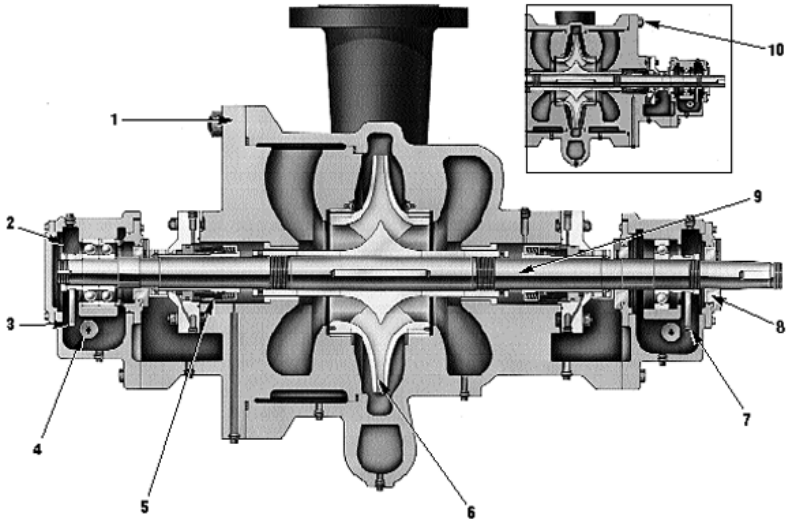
Between bearings, single stage, double section radially split pump—API 610 Type BB2. (1) Pump casing and cover with metal-to-metal confined gasketed joint, (2) Thrust bearing housing with back-to-back angular contact ball bearings, (3) Oil ring lubrication, (4) Cooling insert, (5) Seal chamber and cartridge mechanical seal, (6) Double suction impeller, dynamically balanced, (7) Radial bearing housing with deep-groove radial ball bearing and oil ring lubrication, (8) Labyrinth-type flingers at all bearing housing—shaft openings, (9) Heavy duty shaft to limit deflection at the seals and impeller, (10) Double cover design on some models. (Flowserve Corporation)
